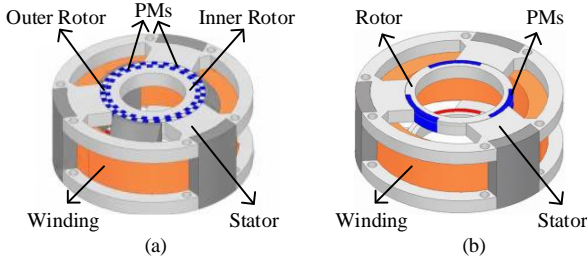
Transverse flux PM machines [57]. (a) Dual-rotor TFPM machine. (b) Conventional TFPM machine.
